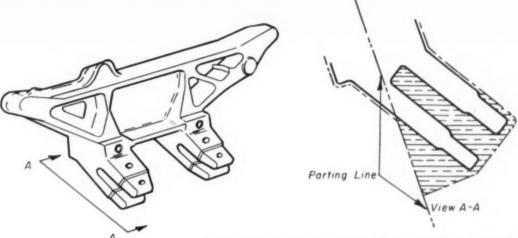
Perspective View of Aircraft Part and Sketch Showing the Hatched Metal at Forks Machined Away Prior to Heat Treatment
